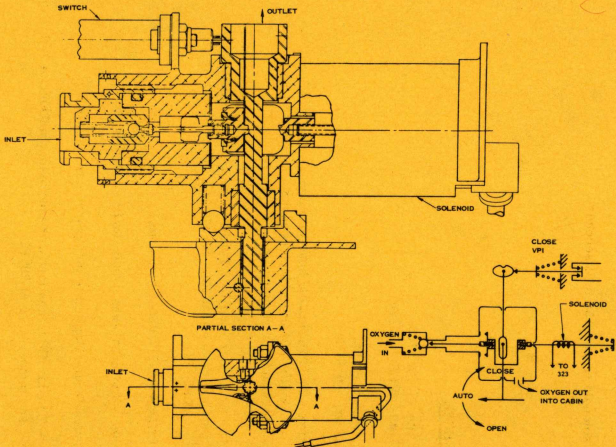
Sectional View of Manual Override Solenoid Valve
